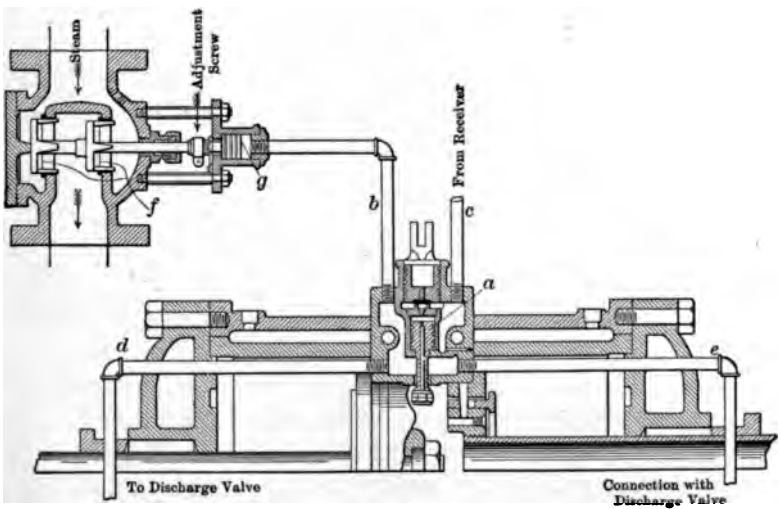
Ingersoll-Sergeant Regulator and Unloader.
